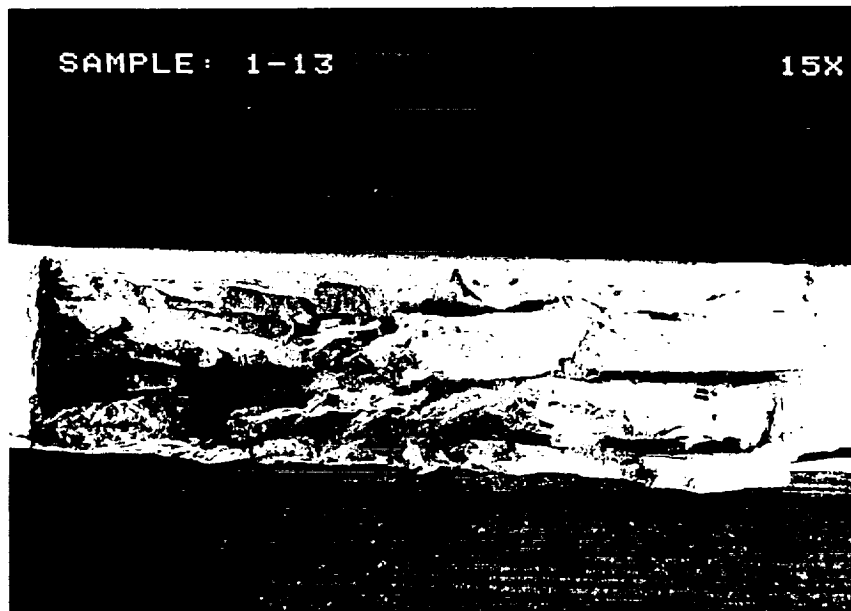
SEM view of fracture in tensile specimen 1-13, 2800F, annealed. 20X.
